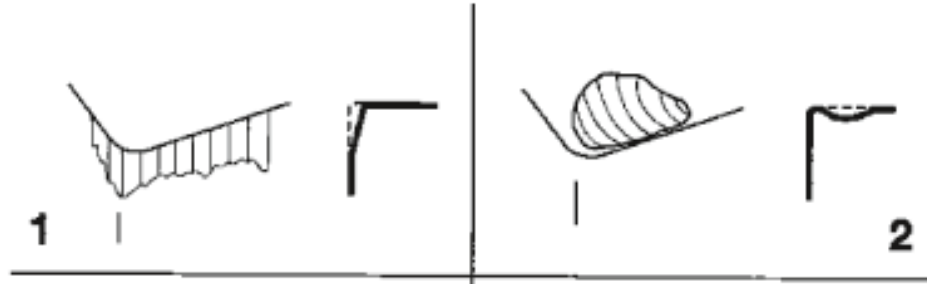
Schematic showing examples of flank wear (1) and crater wear (2) <sup>[16]</sup>.
